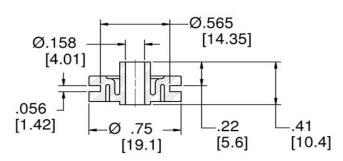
Part Dimensions - J-17736 Series (#6 Screw, With Ferrule)
